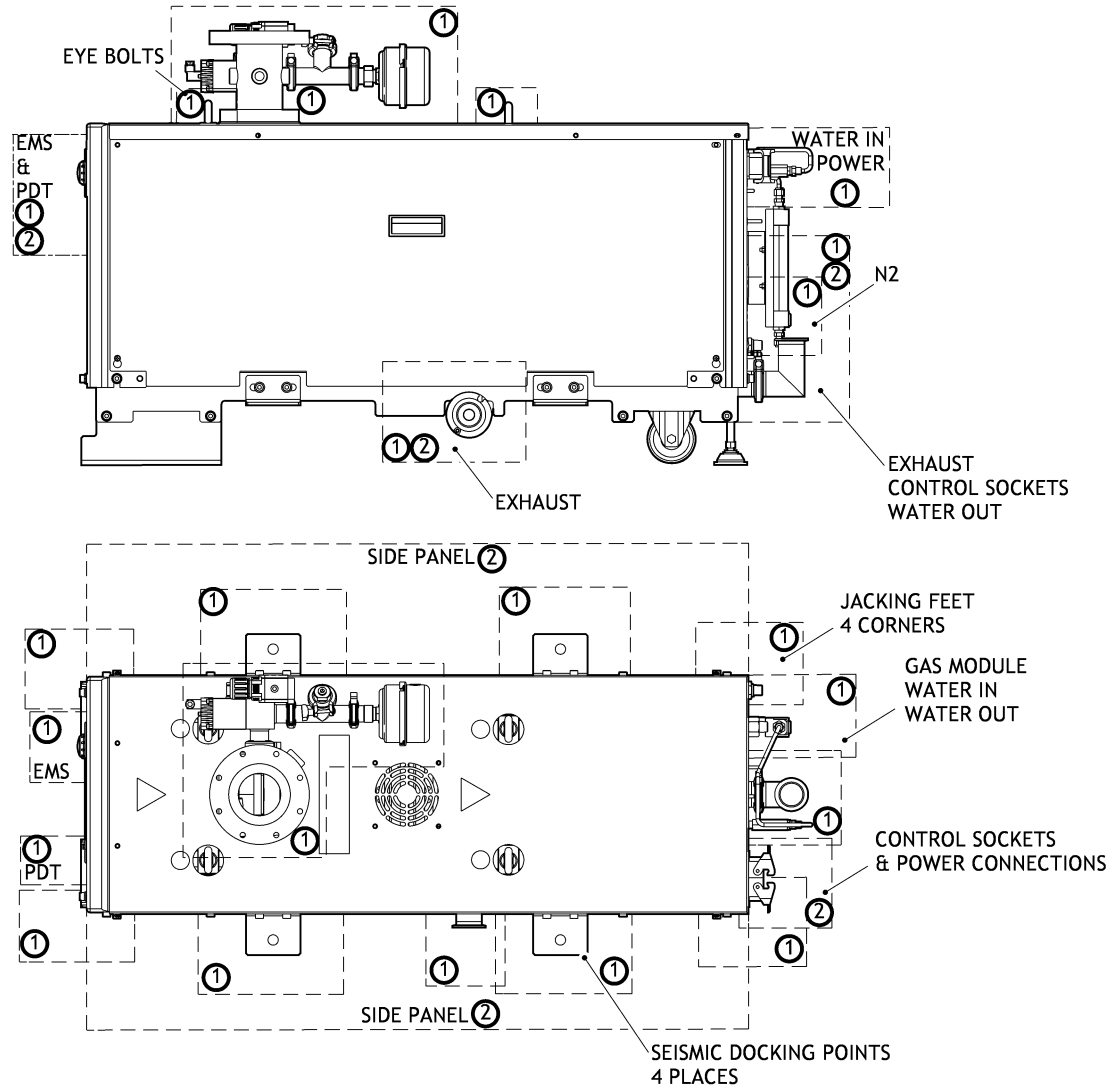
IMAGES SHOWN WITH OPTIONAL CASTOR ASSEMBLIES
